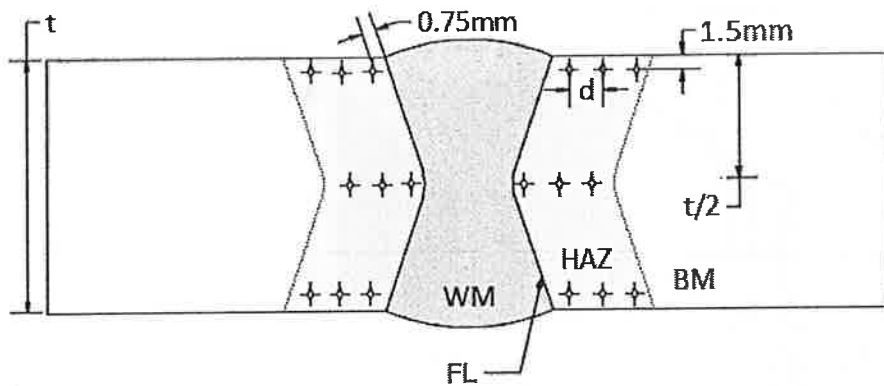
Hardness test locations, d - 1mm, t - pipe wall thickness
